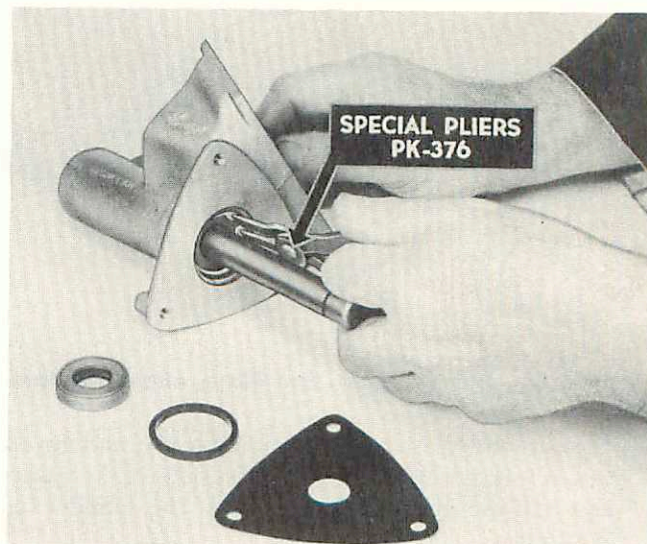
Retaining Ring is Removed With Snap Ring Pliers
